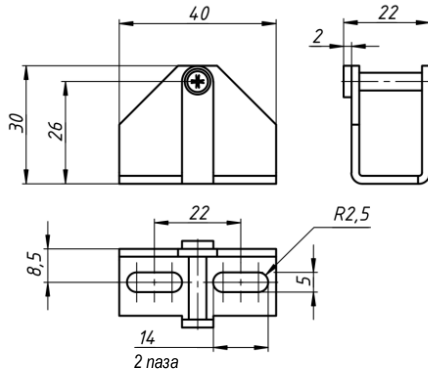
Promix-AD.DB.21 latch overall and mounting dimensions
